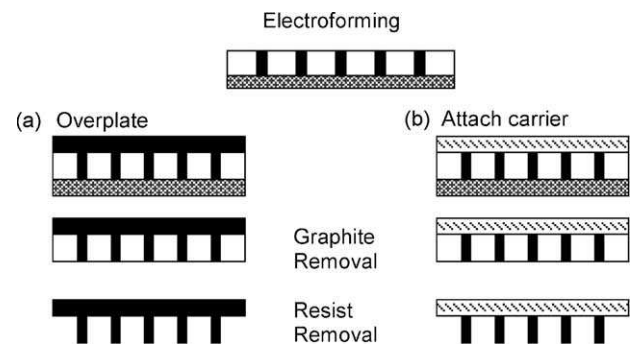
Process steps (after the metal electroforming in Fig. 1) for the fabrication of (a) an injection mold for MEMS manufacture, and (b) arrays of small MEMS components for subsequent pick-and-place assembly.
